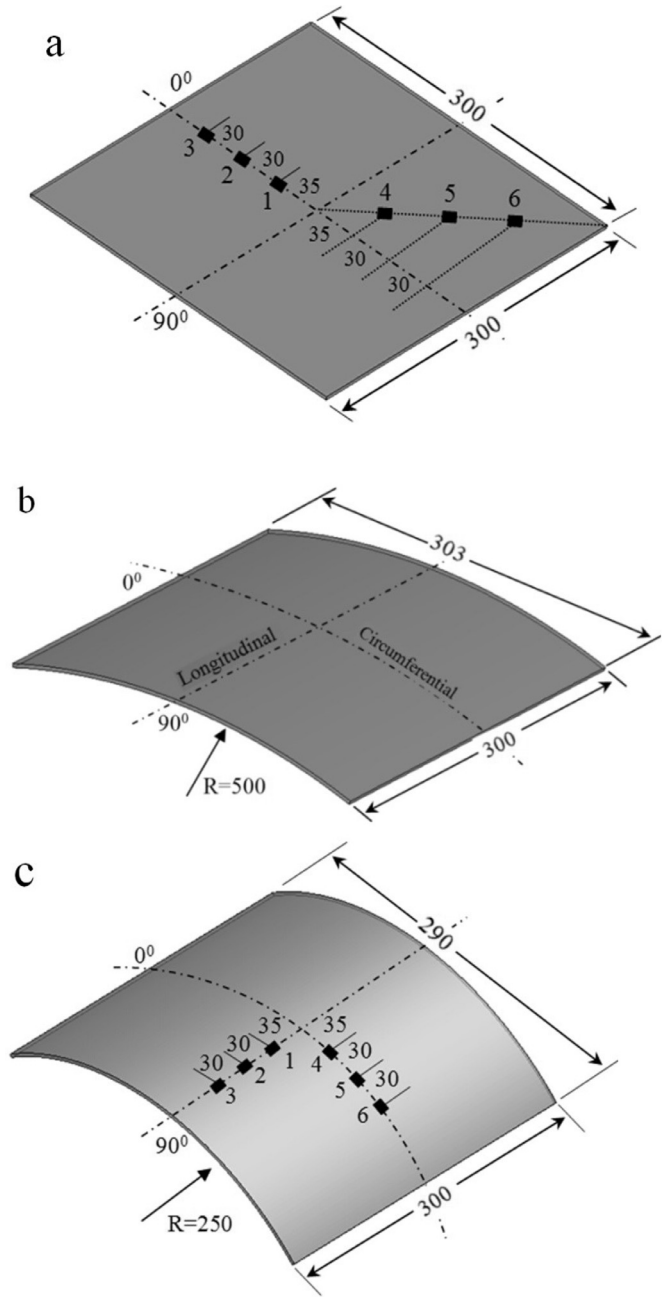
Dimensions of specimens and gauge positions, (a) Flat, R=infinity, (b) R = 500 mm, (c) R = 250 mm. Unit: mm.
